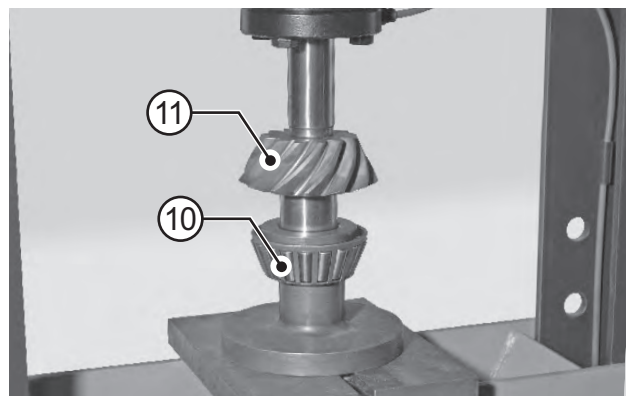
Position the internal bearing (10) and the pinion (11) under a press; force the bearing onto the pinion.
